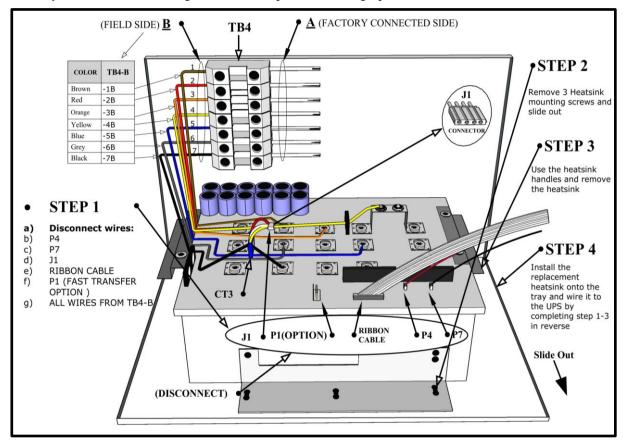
Heat sink assembly (10KVA ~ 40KVA)
